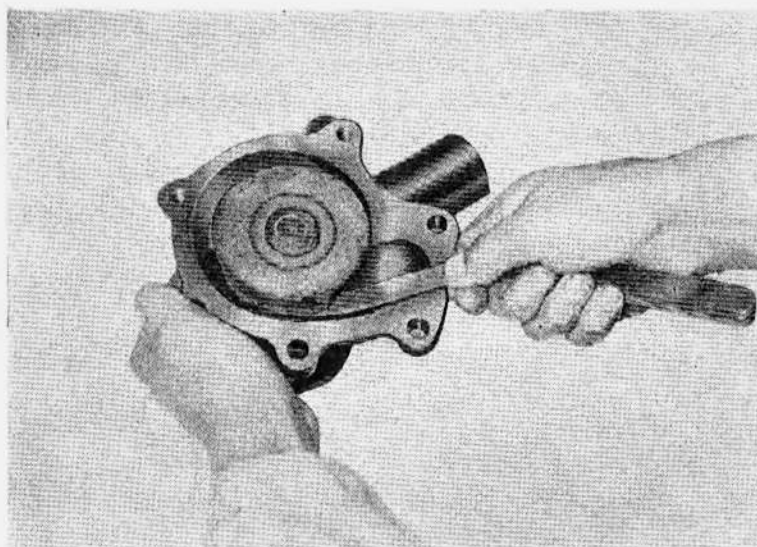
Checking Clearance between Face of Rotor and Pump Body
